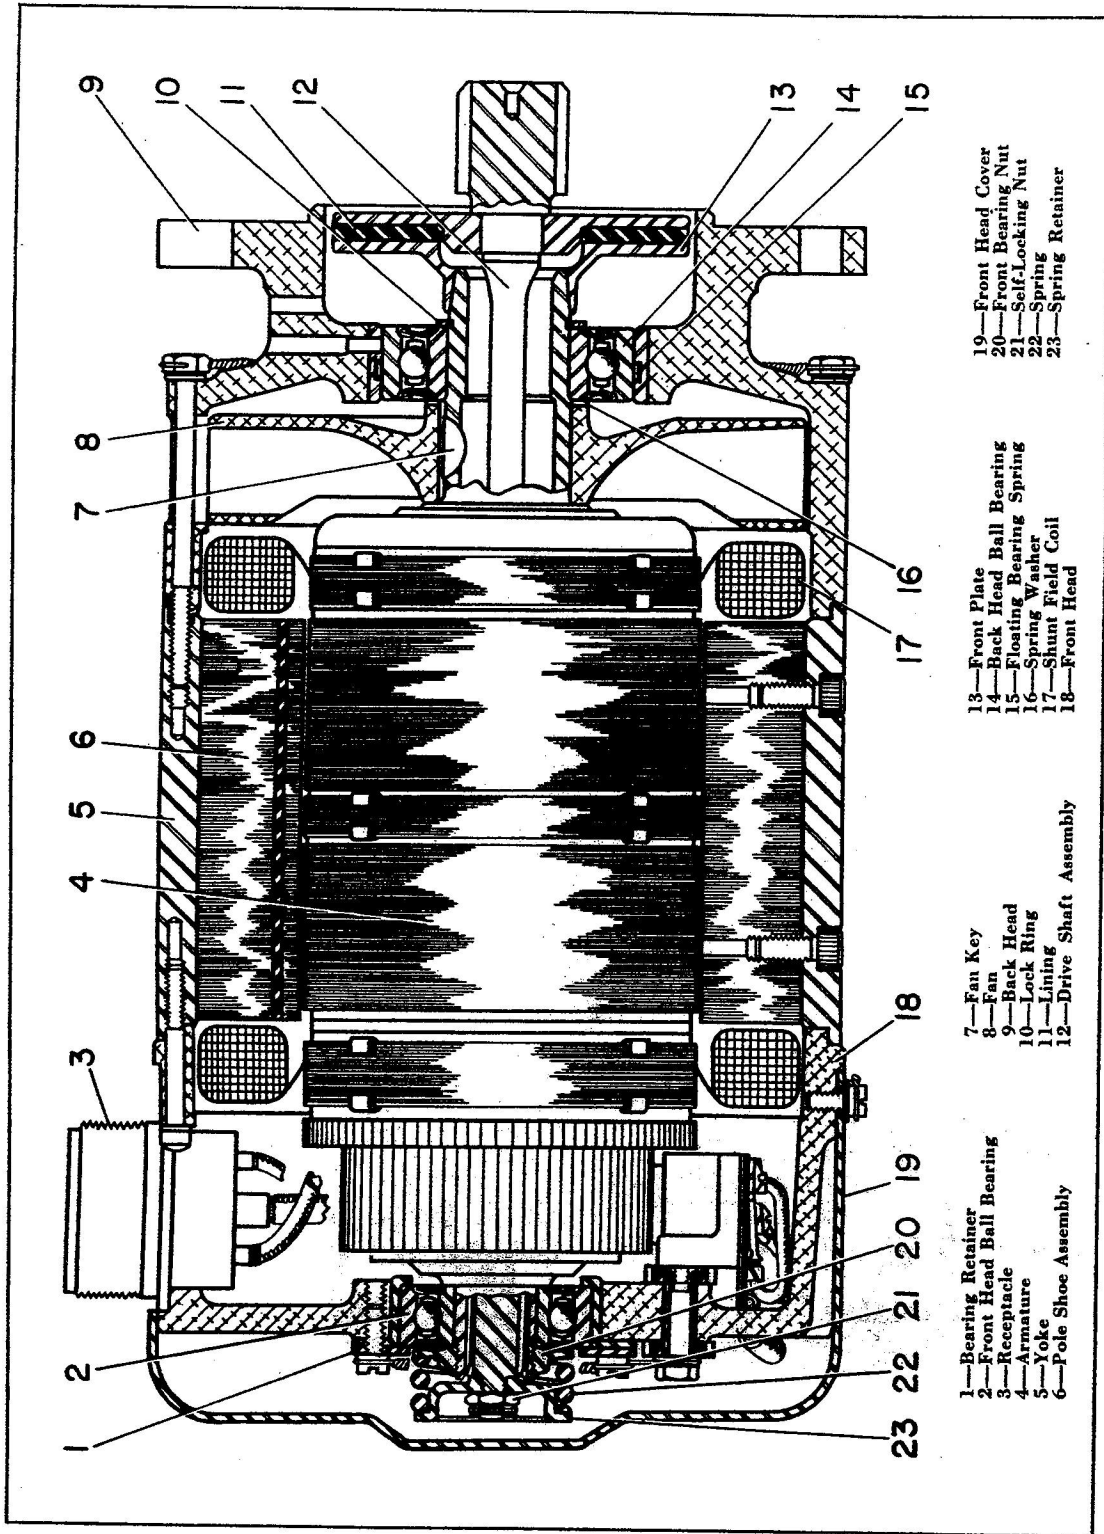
Sectional View Drawing - Eclipse-Pioneer Type 30E01-1-A Generator
